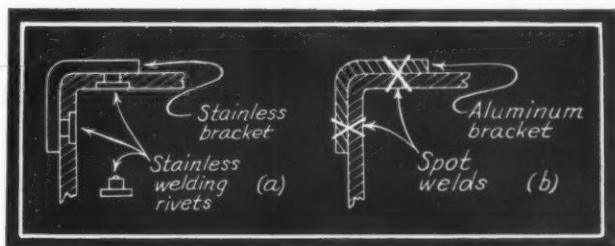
Bracket at (a) was stainless steel requiring drilling, counterboring and stainless welding rivets. Redesign at (b) utilizes spot-welded aluminum bracket
